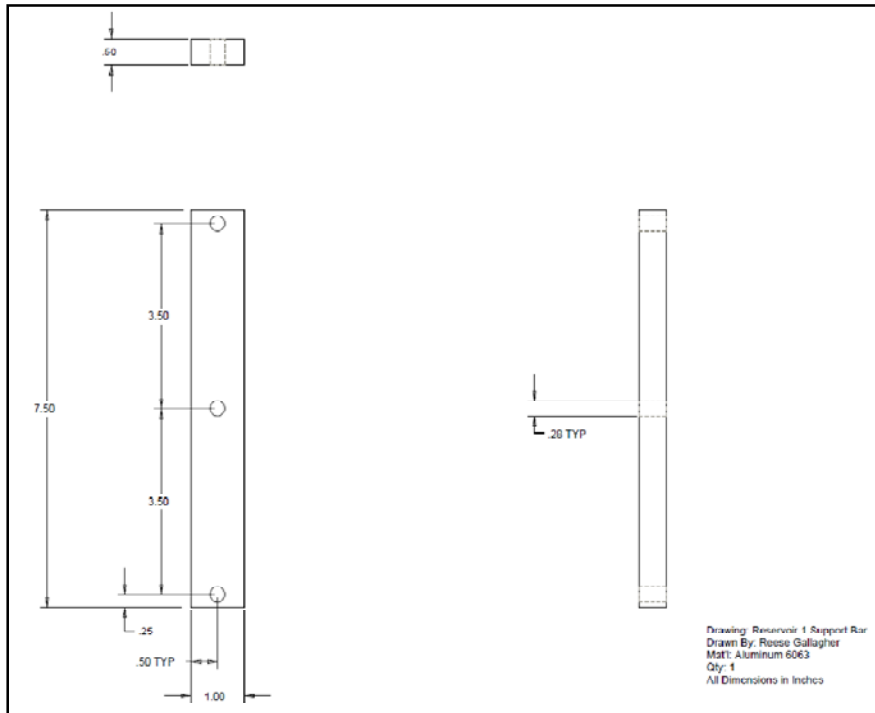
Reservoir 1 Support Bar Dimensional Drawing
